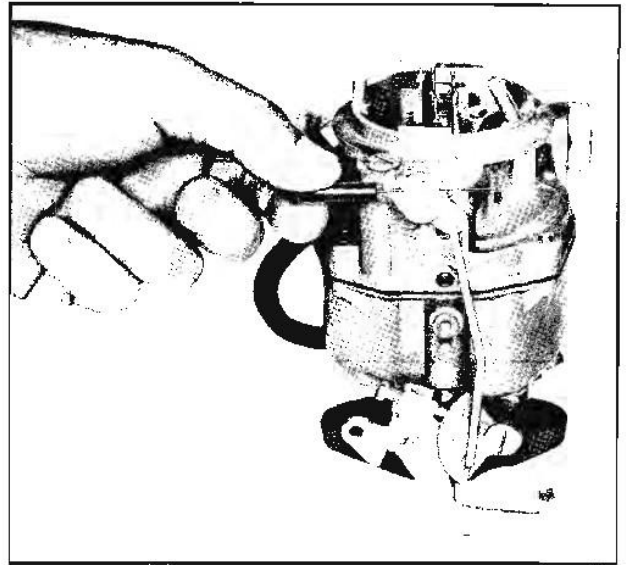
B-29 Trip Lever and Choke Rod Lever Clearance
